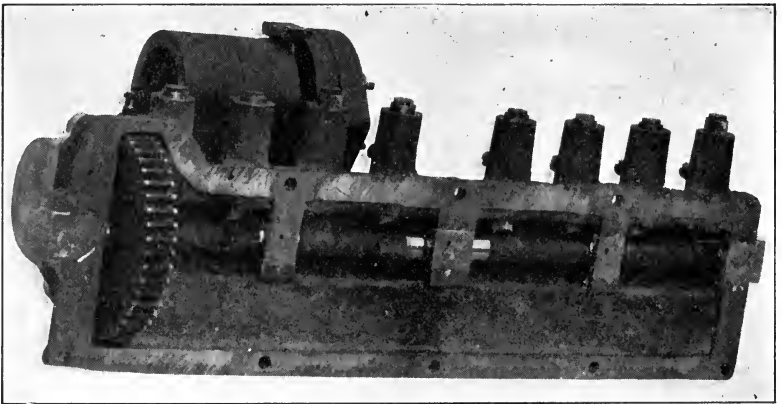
Cam Shaft and Valve Operating Plunger Case of Hupp Motor, a Separate Member. Note Simple Type of Cam Follower.
